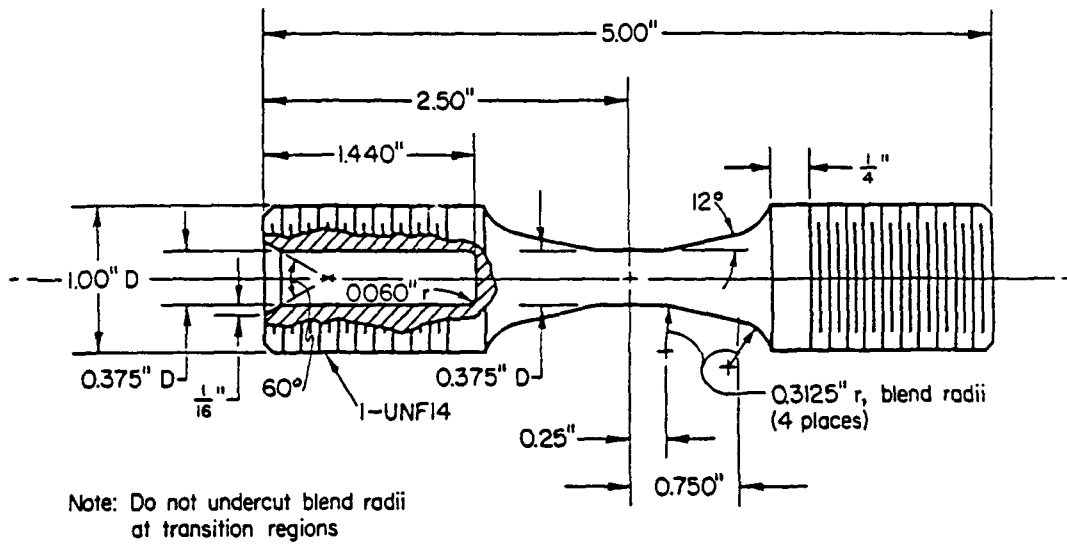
AXIAL FATIGUE TEST SPECIMEN (DIMENSIONS IN INCHES)
